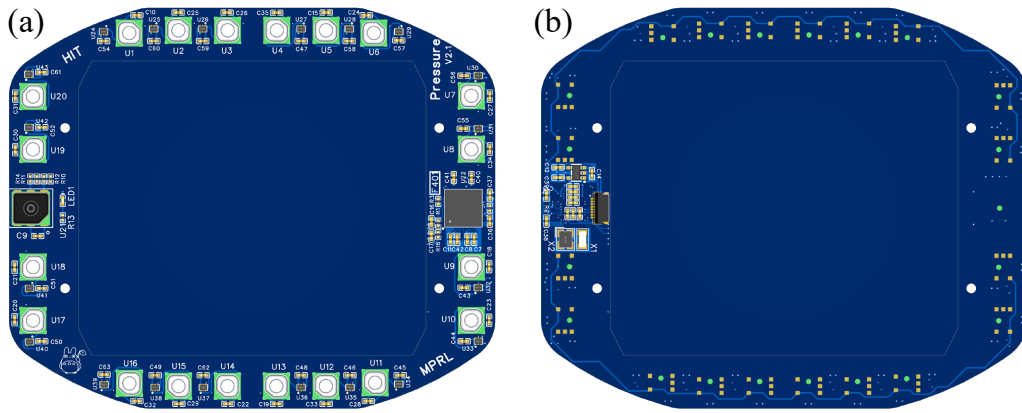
Structure of the pressure sensor board: (a) Top view; (b) Bottom view.
